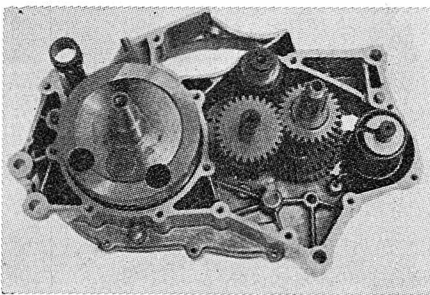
View of right half of crankcase with crankshaft and transmission correctly positioned for reassembly.
